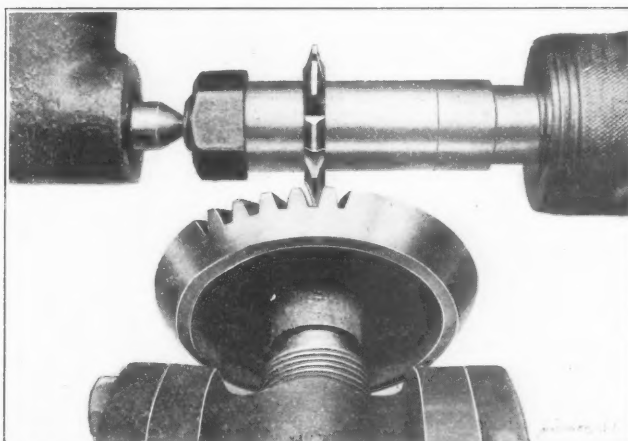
Cutter Completing the Tooth, showing Widened Tooth Space.
